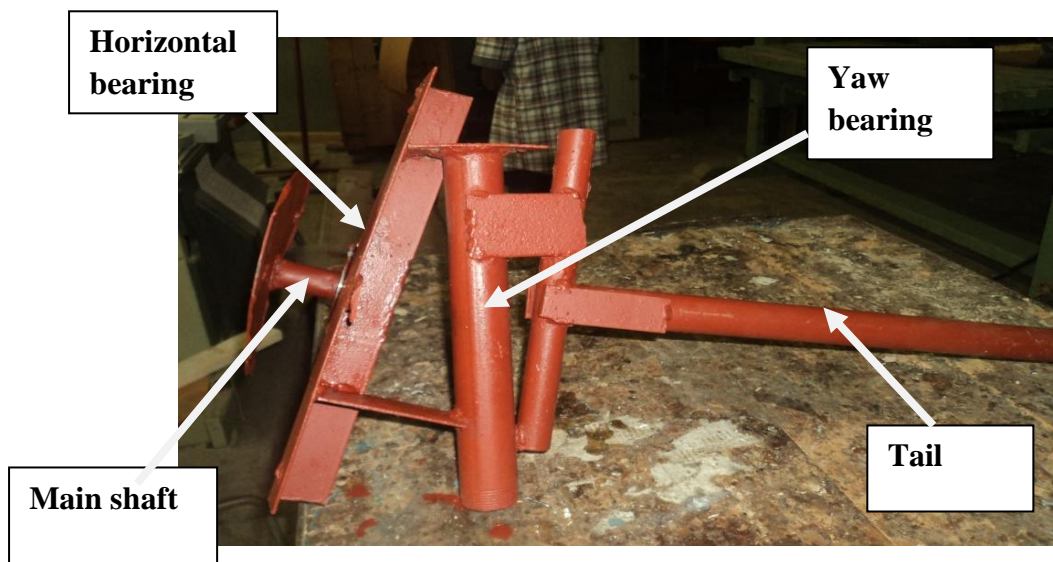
12: Photo of the Assembling Frame of the Prototype
